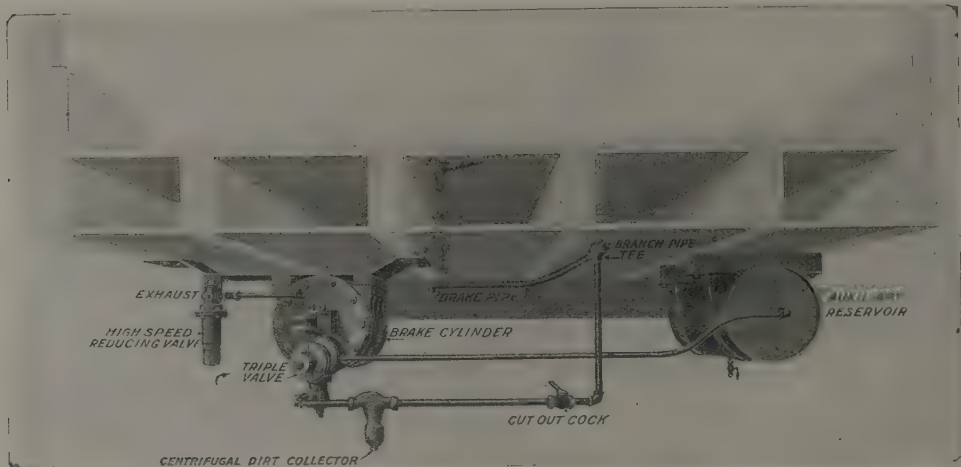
Arrangement of High Speed Brake Under Passenger Train Car.
